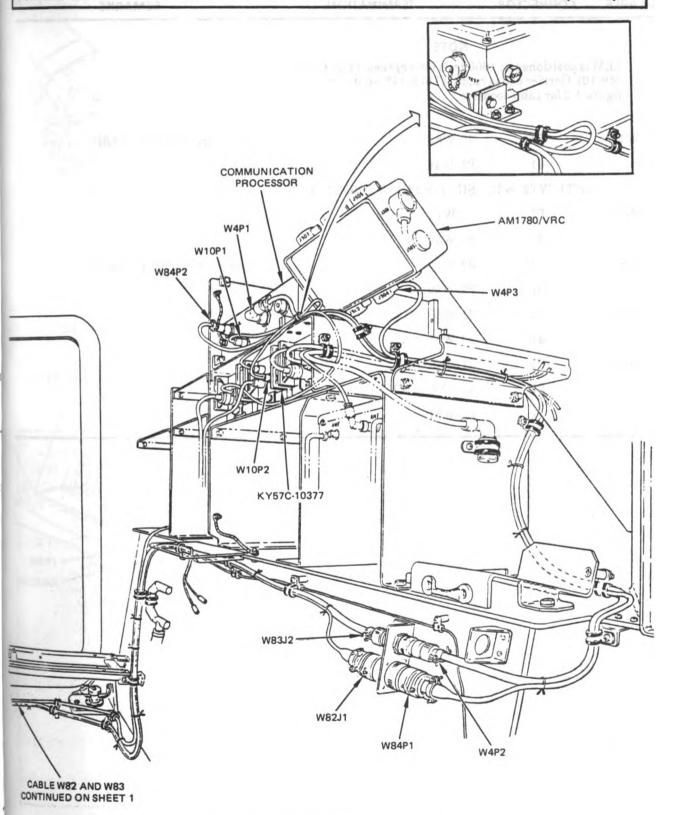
Vehicle Cab Interconnecting Cable Assemblies (Sheet 2 of 2)
